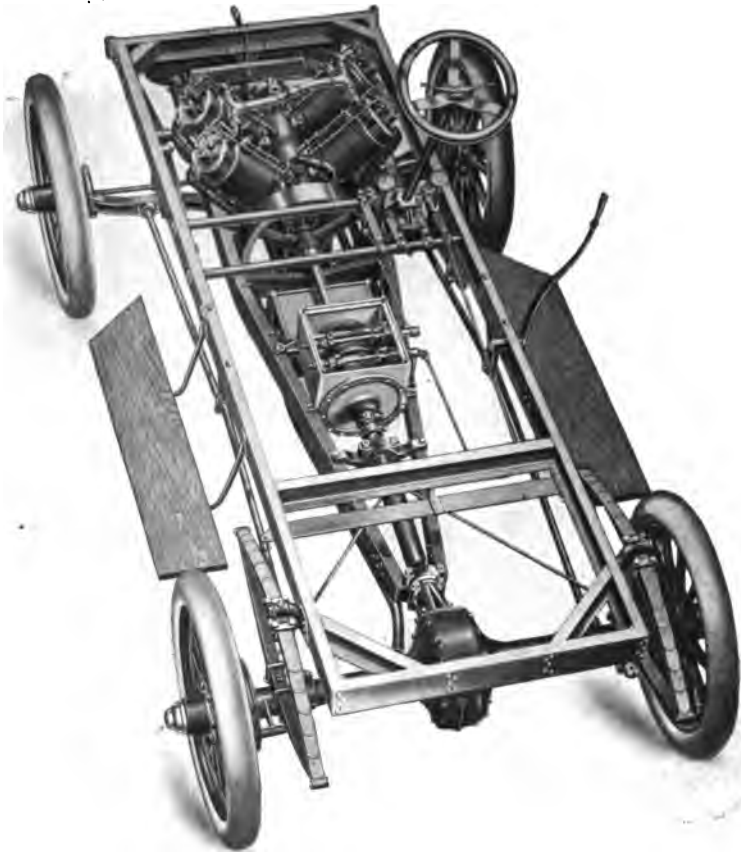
Typical Chassis of a Motor-Car, Showing Running Gear and Power Plant.
